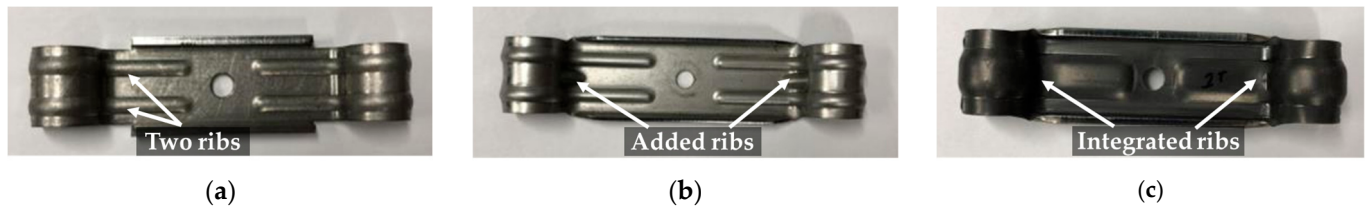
Fixing device details: (a) R type; (b) RP type; (c) IR type.
